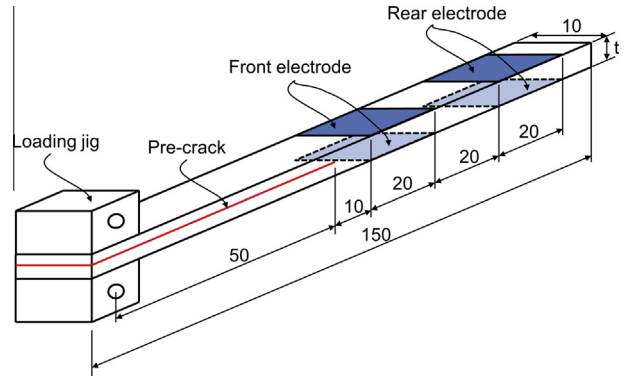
Dimensions of the DCB specimens of the unidirectional glass fiber epoxy composites.
